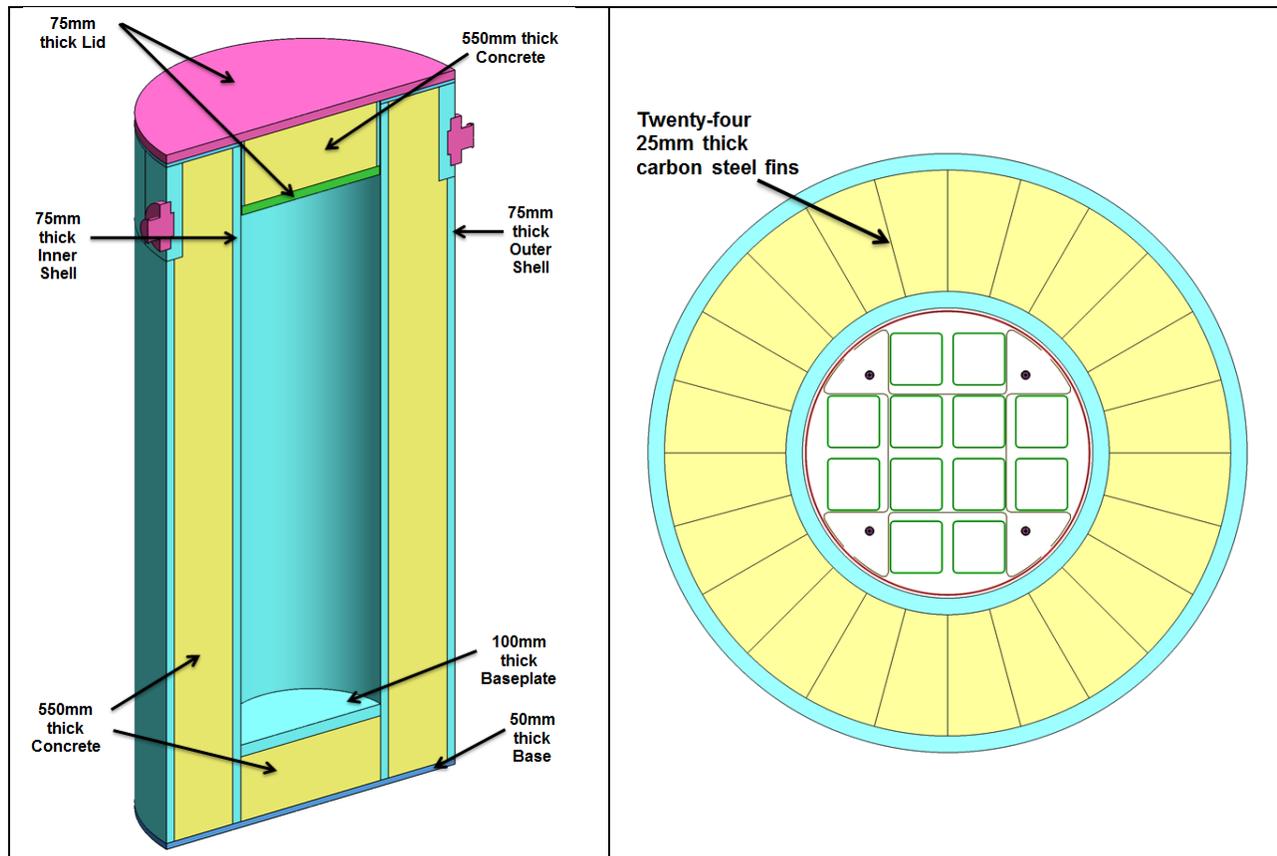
Vertical (left) and horizontal (right) section through the Storage Overpack
